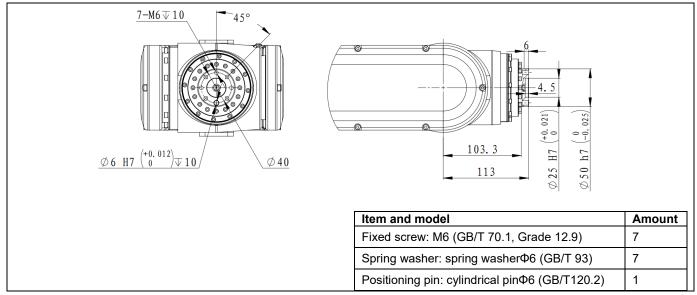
End flange mounting interface (QRC-405 Eco)
